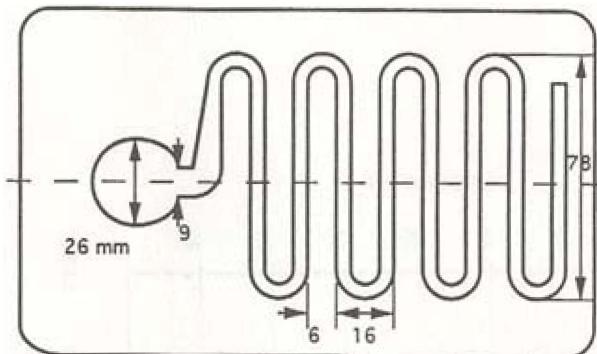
Illustration of fluidity serpentine test mold (lower part).
